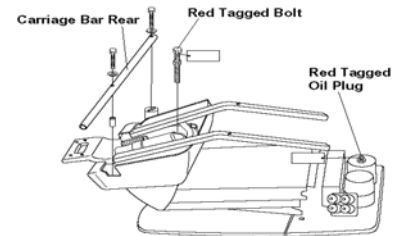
Removing Carriage Bar Rear, Red Tagged Bolt and Oil Plug
